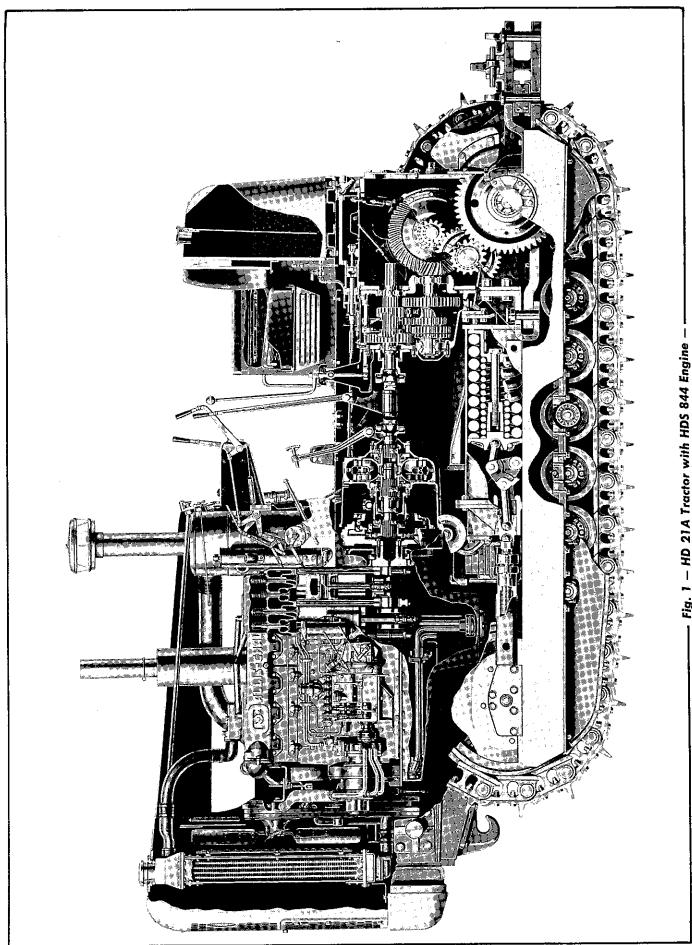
HD 21A Tractor with HDS 844 Engine — Sectional View
